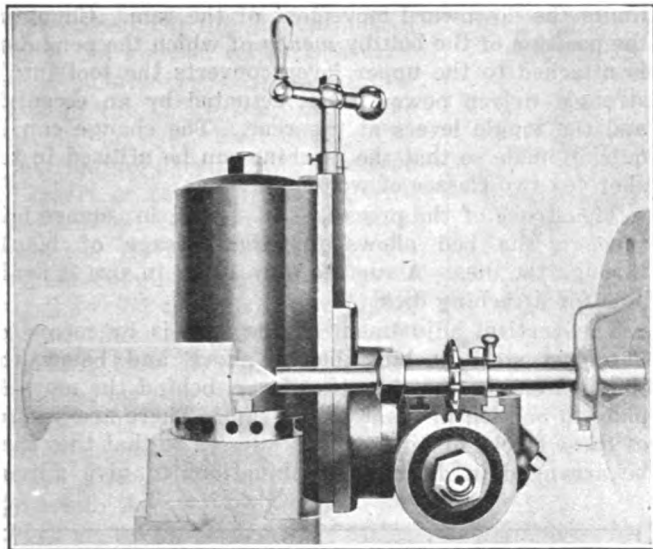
GARRETT "MILLERETTE" ON LATHE
